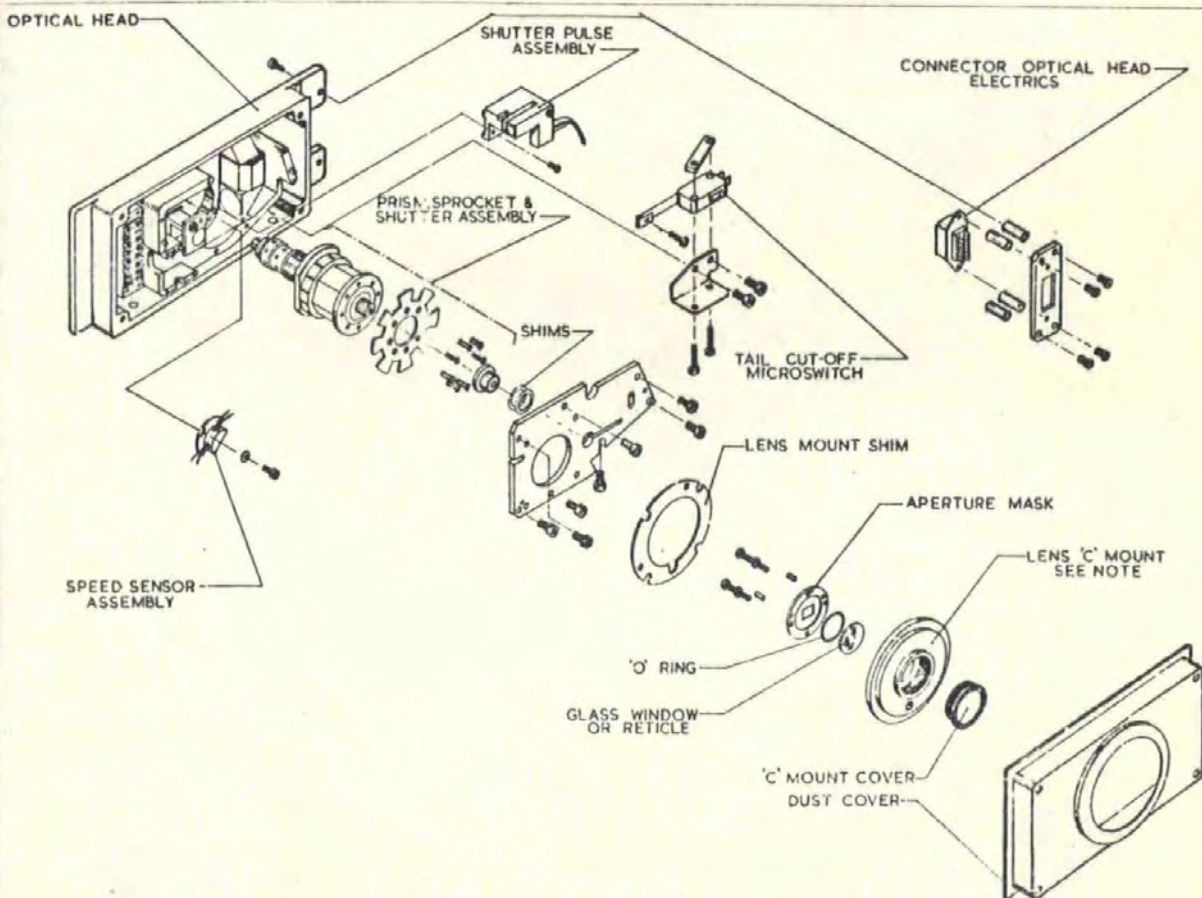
Rotating Prism Mechanism and Optical Head.
